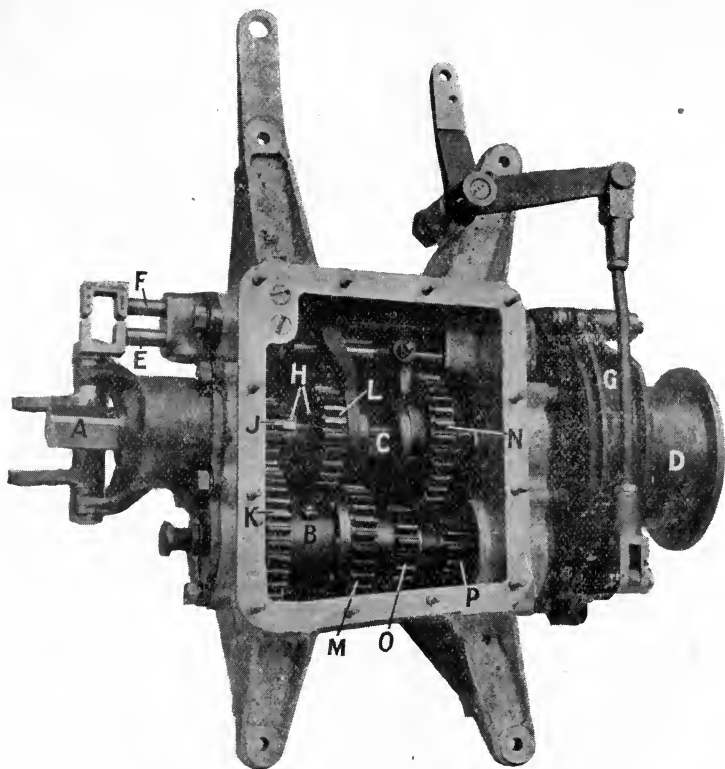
DIRECT DRIVE GEAR BOX, NEUTRAL POSITION.
